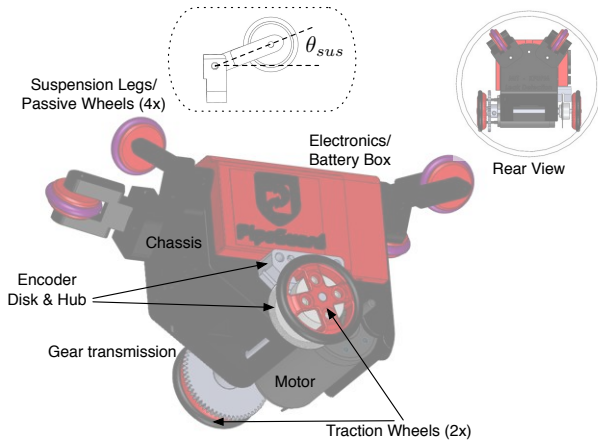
A 3D solid model of the carrier module. A sketch of the carrier's rear view inside a 100mm ID pipe is shown in the top right.
